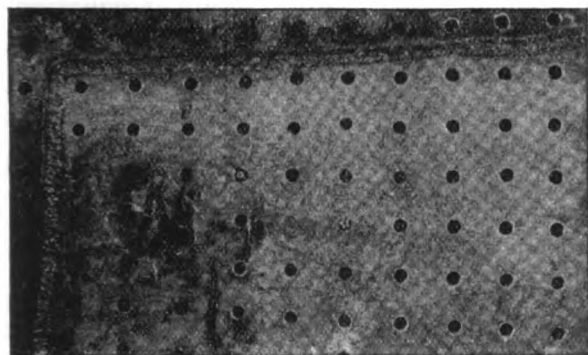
Vertical seam patch made by arc welding in locomotive fire box
